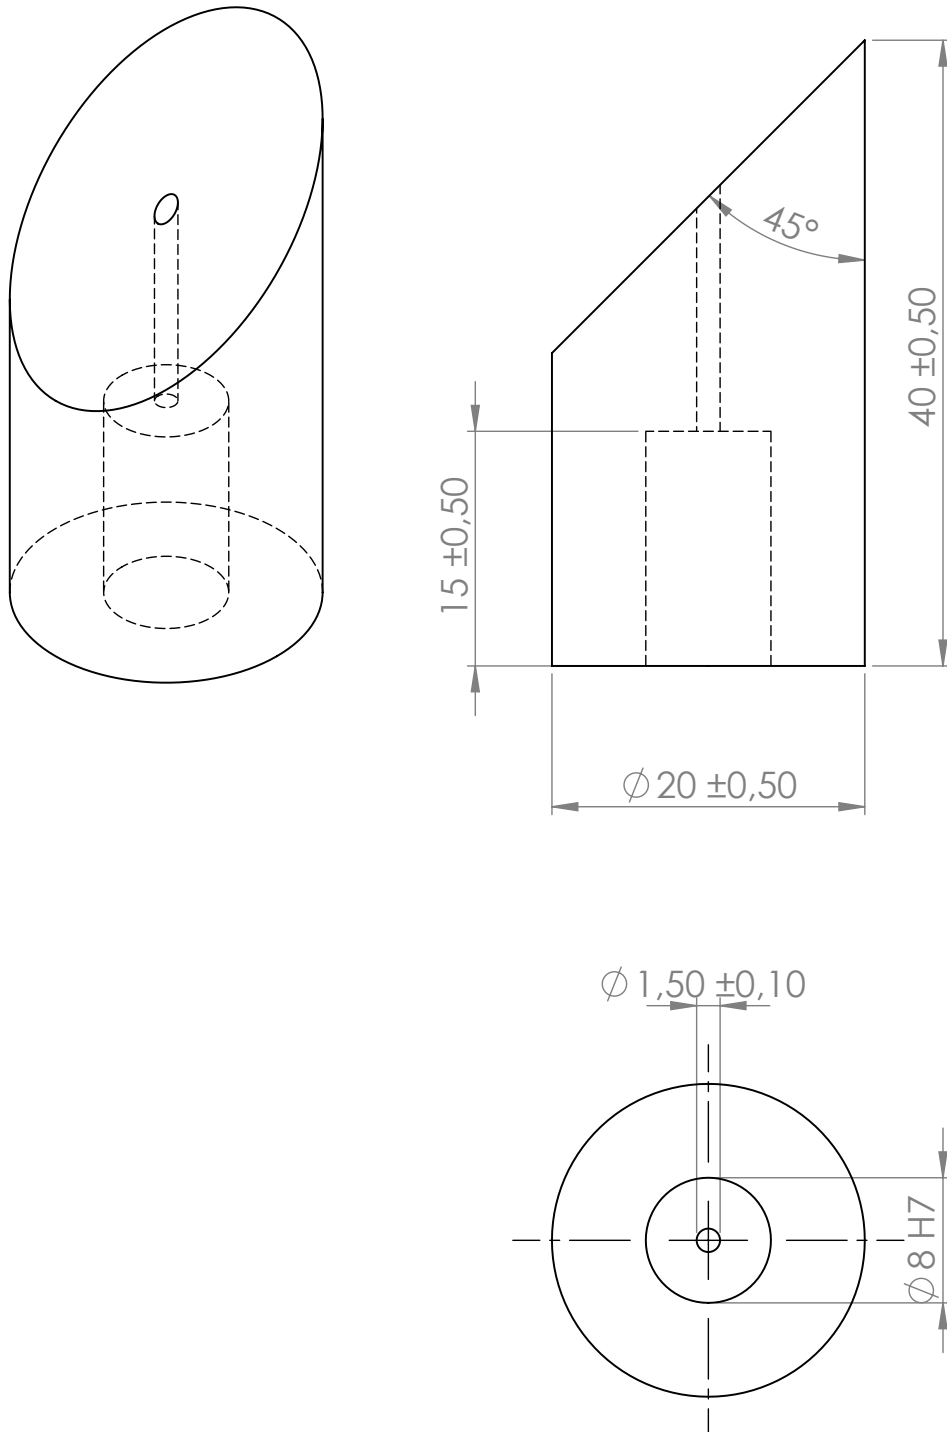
Technical drawing of the stainless steel mirrors used in the 2D-MOT chambers. Dimensions are given in millimeter. Material: 1.4432.
